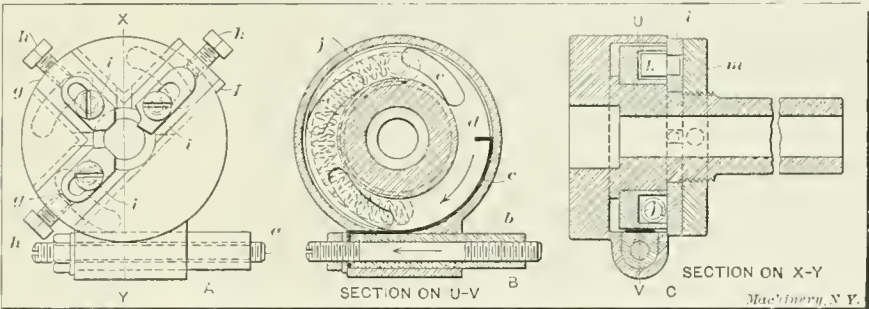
Details of Taper Turning Tool shown in Fig. 16
